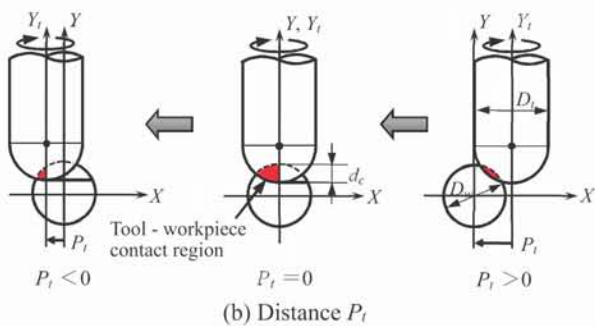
Explanatory diagram of milling process with ball end mill and machine tool axis conventions.
